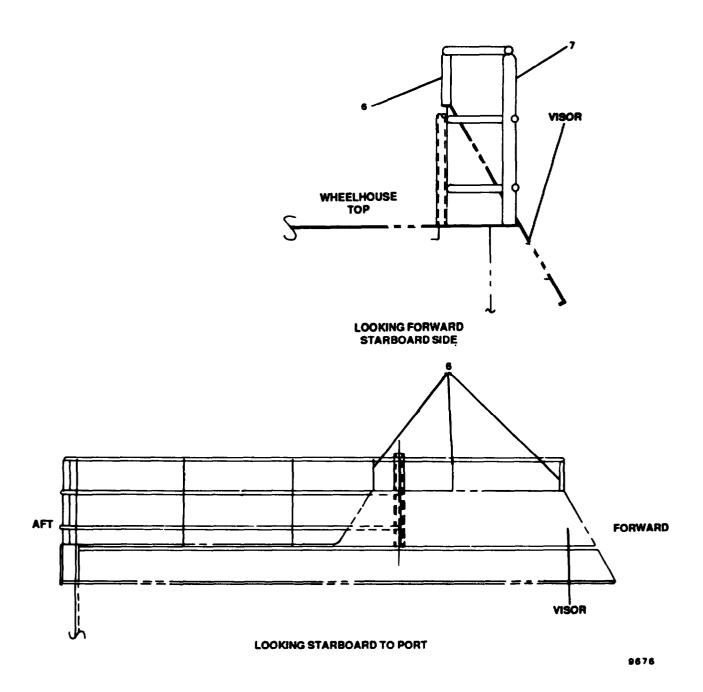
Pilothouse Top Ladders and Handrails (Sheet 3 of 4).
